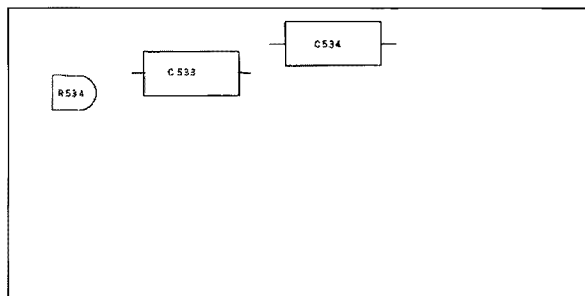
Trimpot R534 is on the mixer board and adjusted in Touch conversion.
